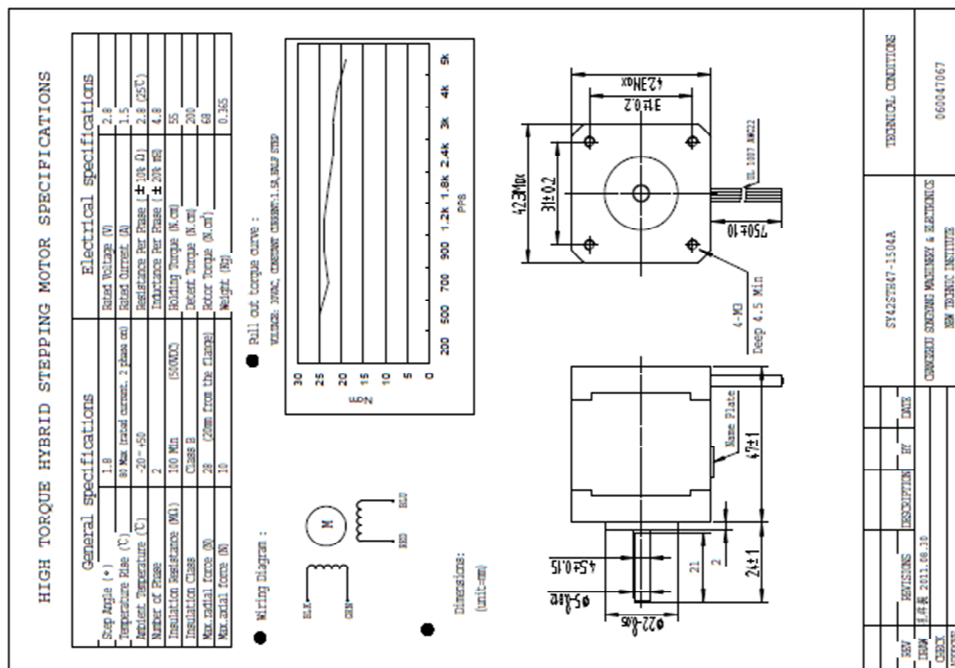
Nema 17 stepper motor specifications (CHANGZHOU SONGYANG MACHINERY & ELECTRONICS, 2011)
